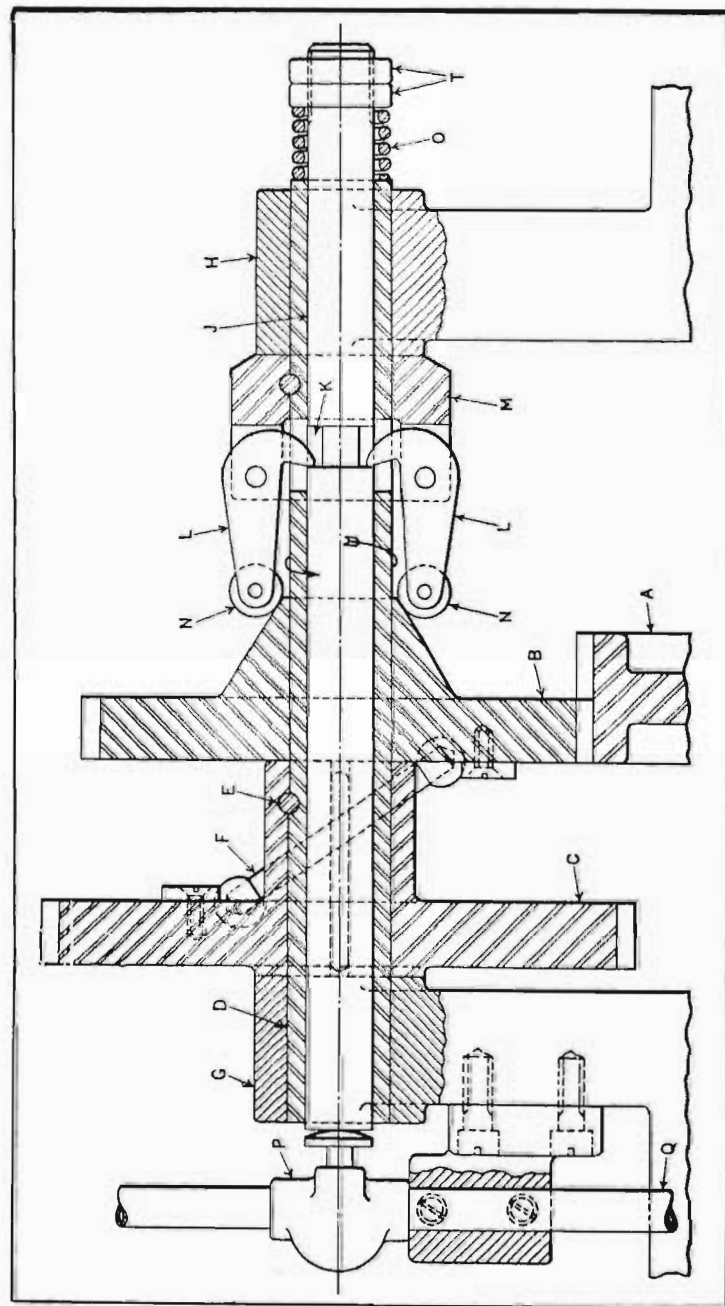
Mechanism for Pneumatically Disengaging Clutch at Remote Point when Machine is Overloaded
